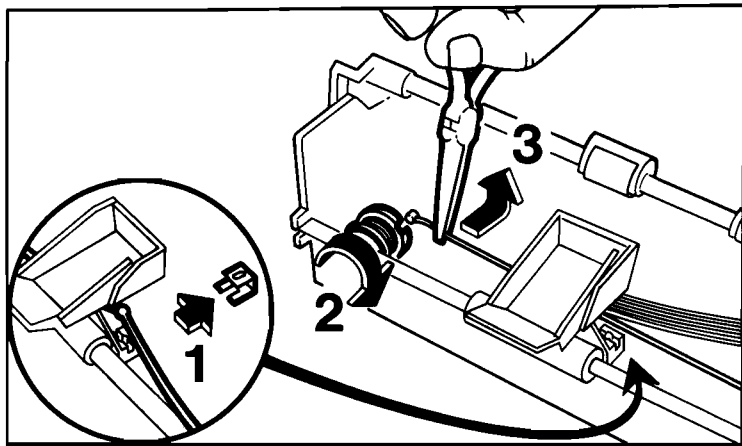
Removing the Carriage and Print Cartridge Cable
